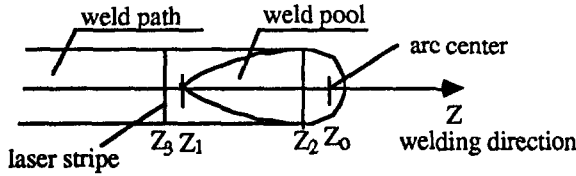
Top view of weld pool region. This top-view shows the position relationship among the arc, weld pool, and laser stripe.
